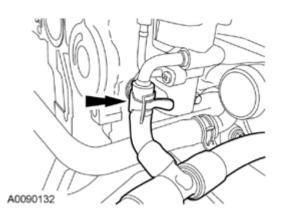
Locating Coolant Hose Of EGR Valve Courtesy of FORD MOTOR CO.
